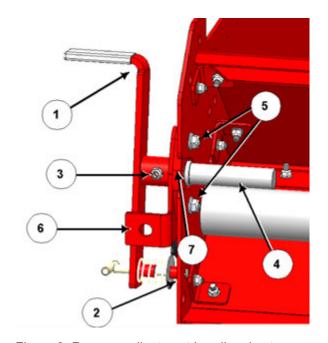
Remove adjustment handle, pin storage and adjustment tube
